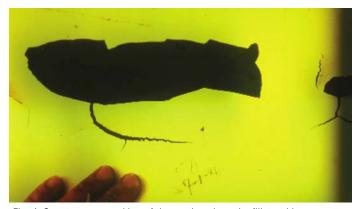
Spontaneous cracking of the coating along the fillet weld
